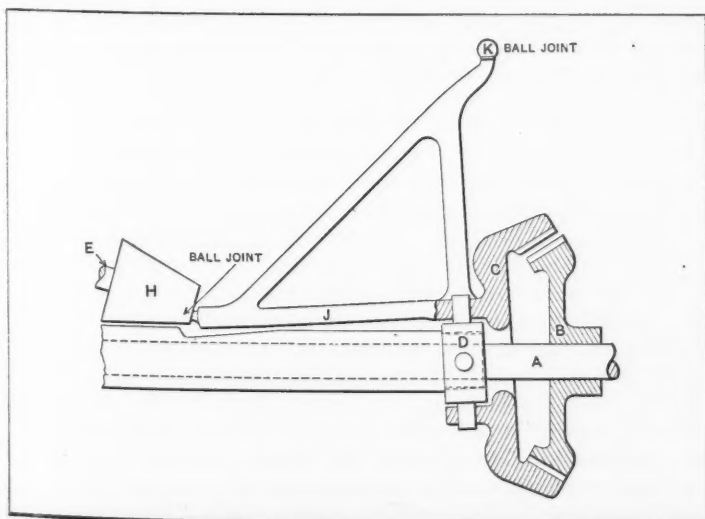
Planetary or "Wobble" Gearing for producing Rapid Reciprocating Motion
